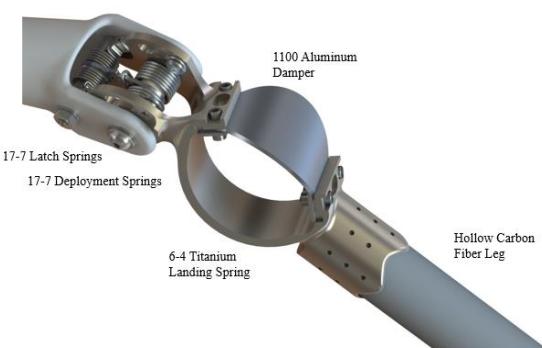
Detailed view of the landing gear mechanism. Carbon clevis, deployment springs and latches, landing flexure and damper, and leg tube are shown.
